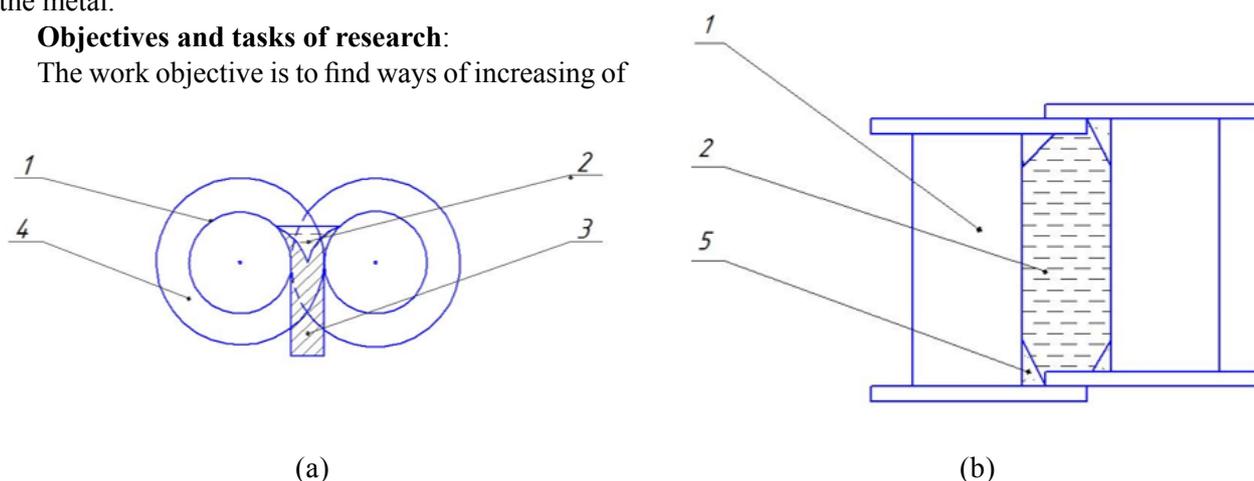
Foundry and rolling mill stand: a) side view, b) top view
